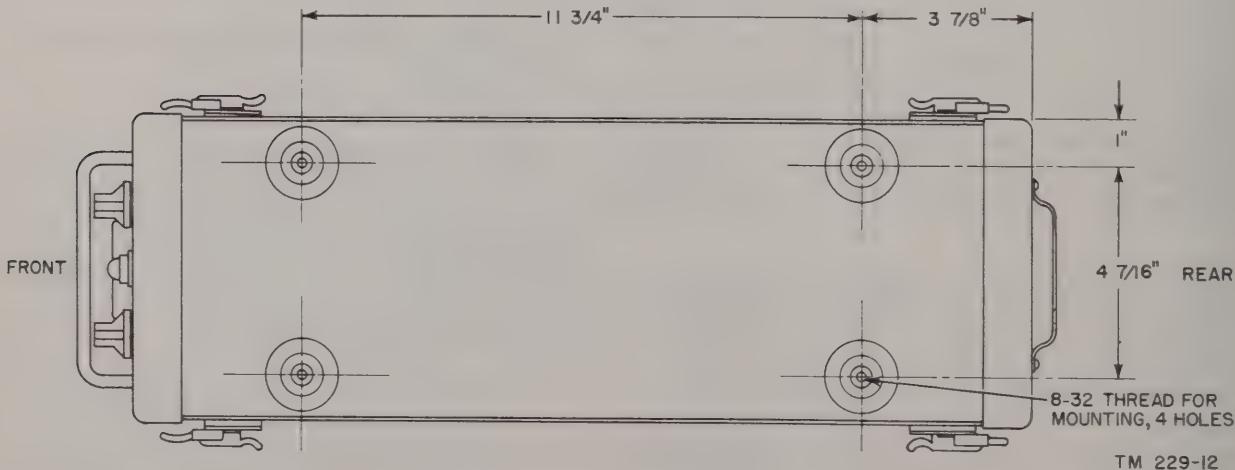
Radio Receiving Set AN/FRR-44, mounting dimensions.
